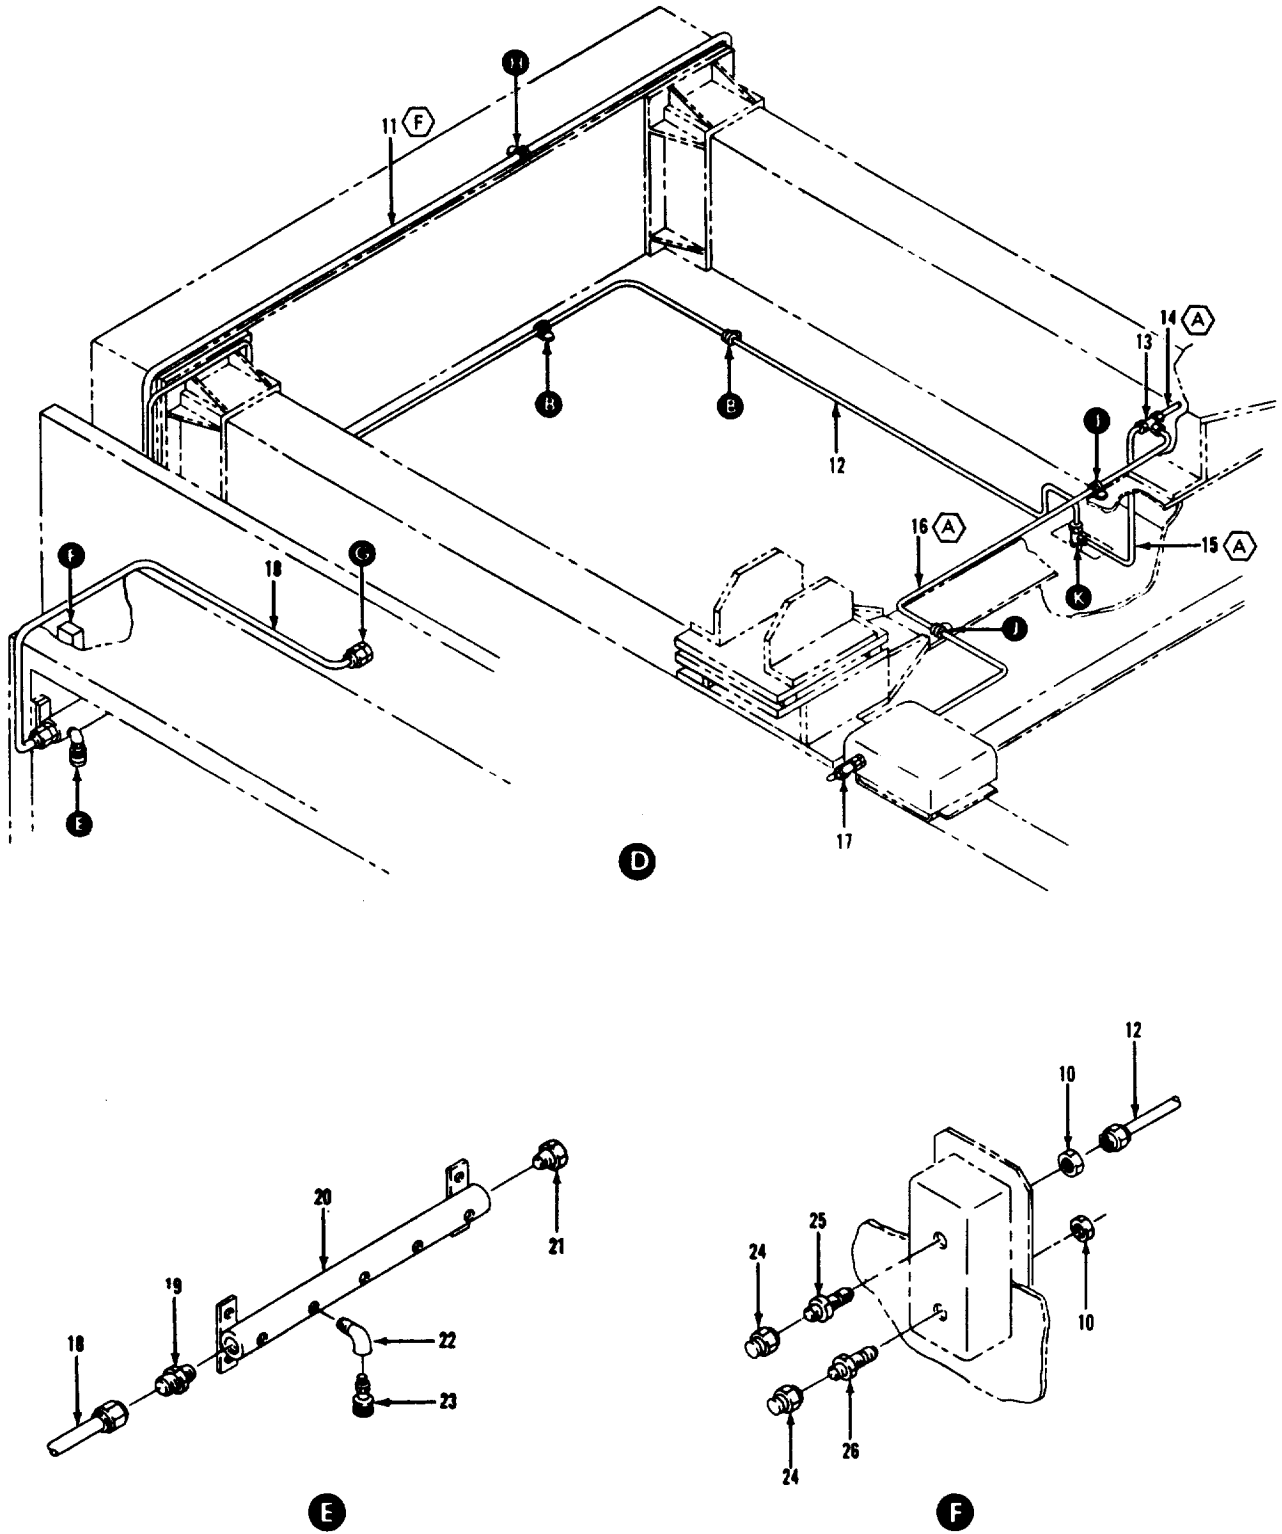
Tubing Installation (Sheet 3 of 17)
